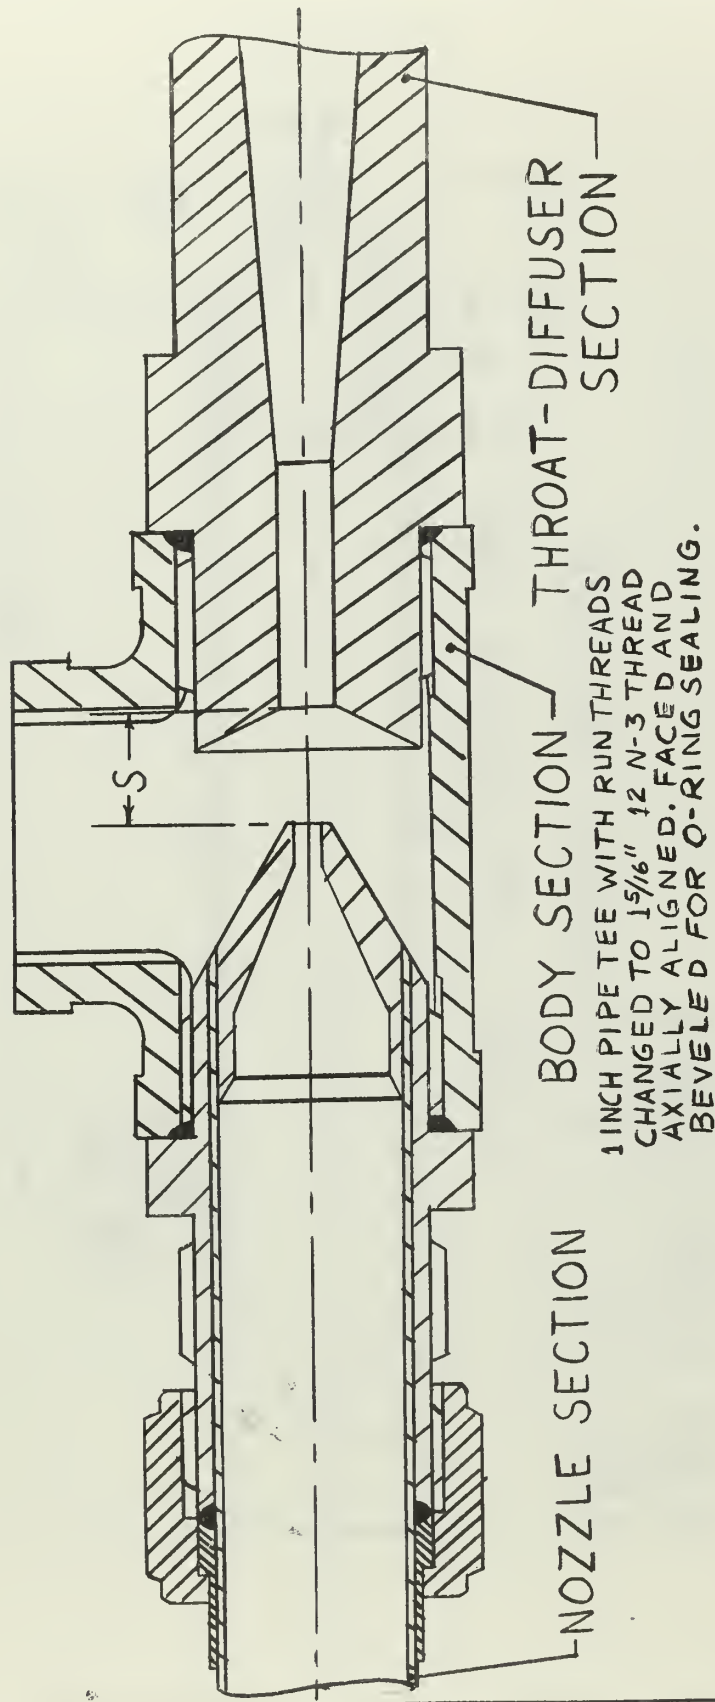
JET PUMP ASSEMBLY SHOWING NOZZLE-THROAT SPACING, S
